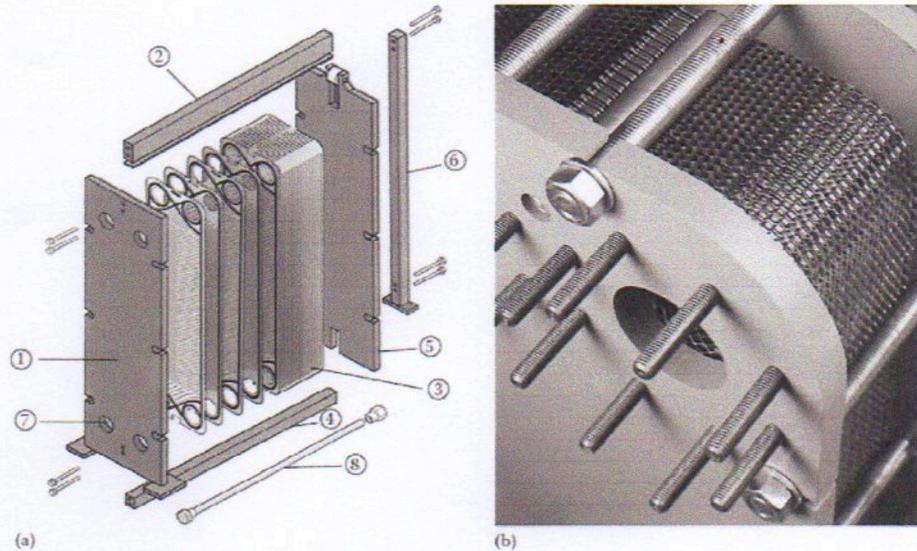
Plate heat exchanger. (a) Construction details—schematic (Parts details: 1, Fixed frame plate; 2, Top carrying bar; 3, Plate pack; 4, Bottom carrying bar; 5, Movable pressure plate; 6, Support column; 7, Fluids port; and 8, Tightening bolts.) and (b) closer view of assembled plates. (Courtesy of ITT STANDARD, Cheektowaga, NY.)
